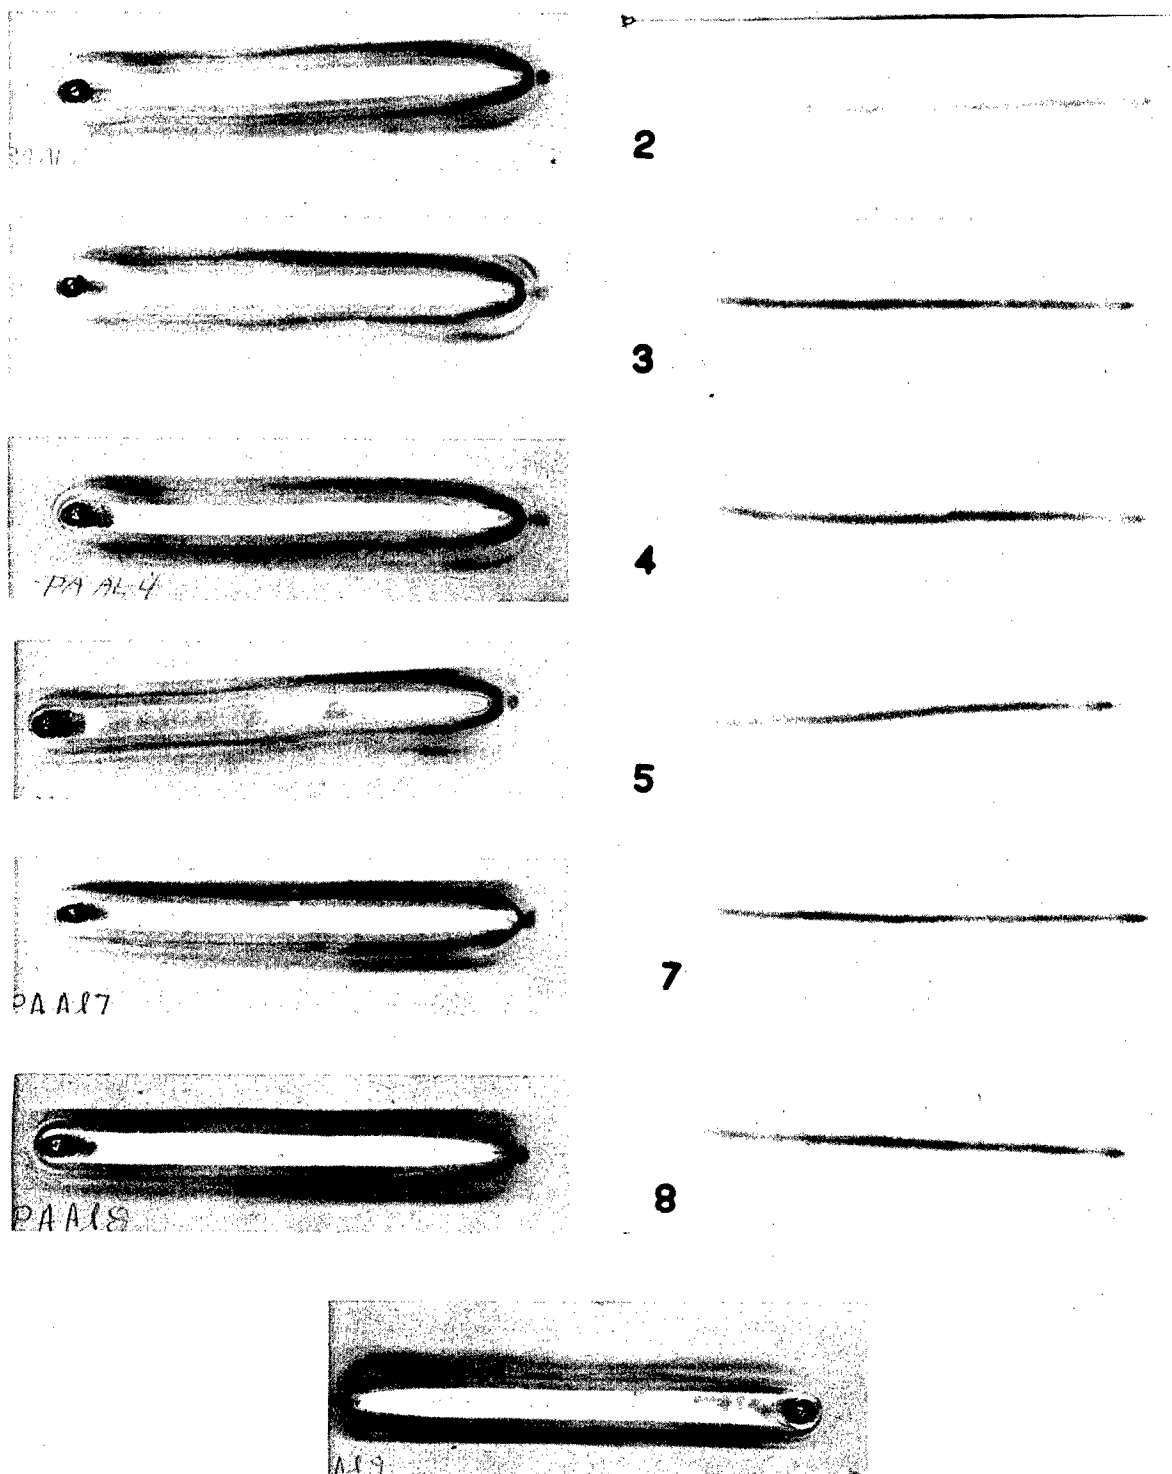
Photographs and Radiographs of Welds Made in Arc-Cast Aluminum Deoxidized Molybdenum Under Purified Argon.
